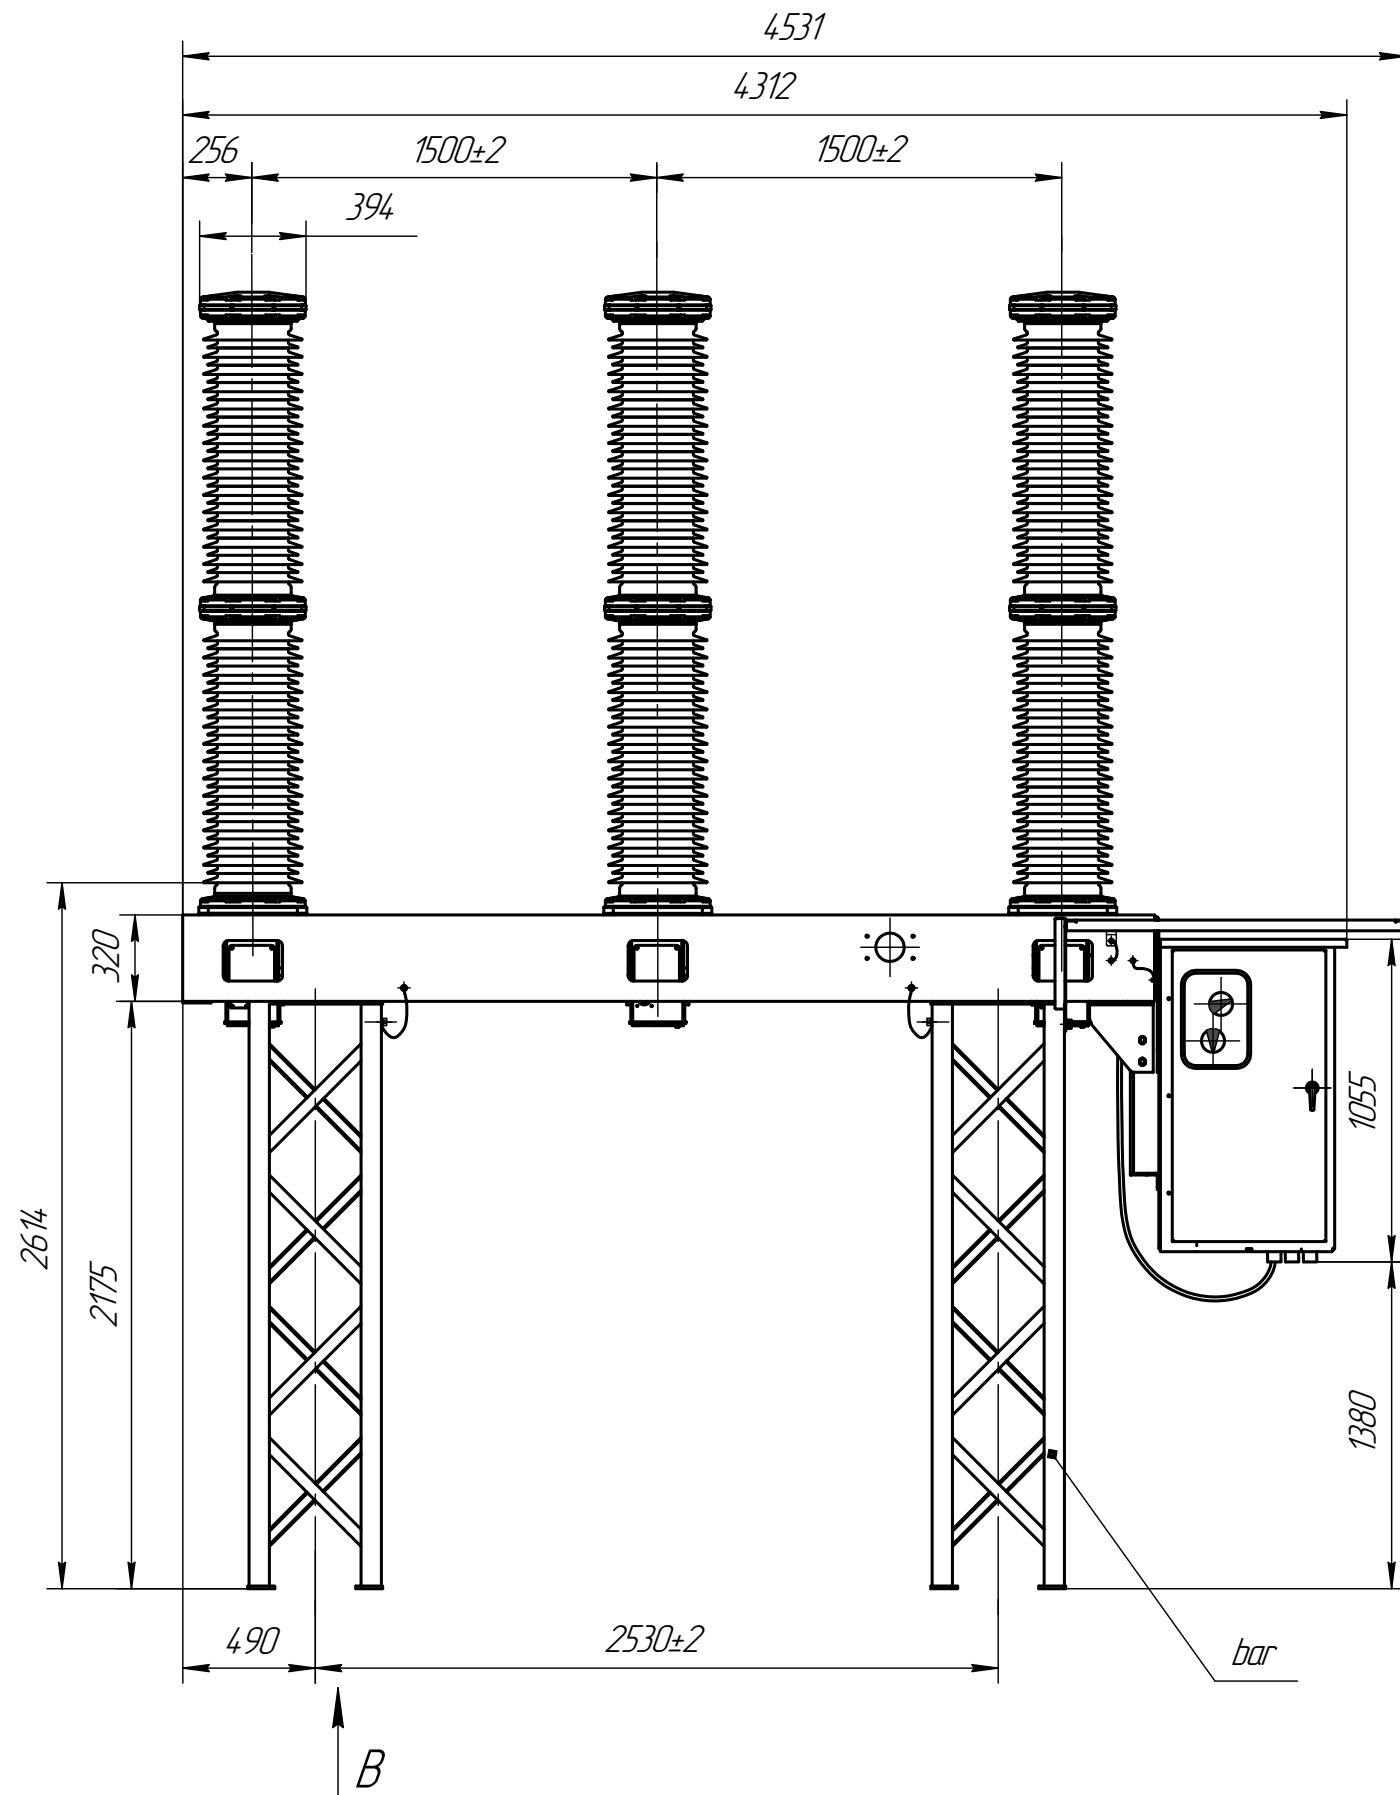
Overall, adjusting and adjoint dimensions of the vacuum circuit breakers type BPC-110 III-31,5/2500 YX/11
